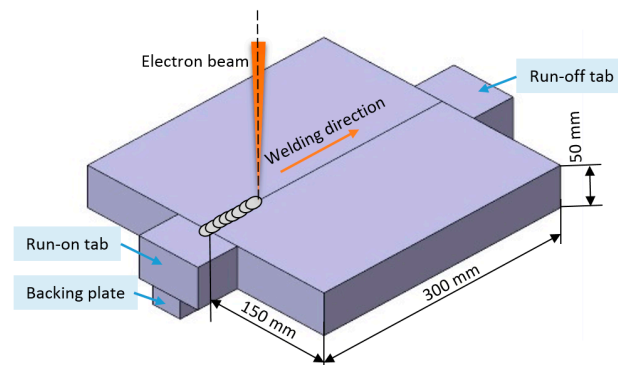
Schematic diagram: the dimensions of test plate, EBW welding direction.
